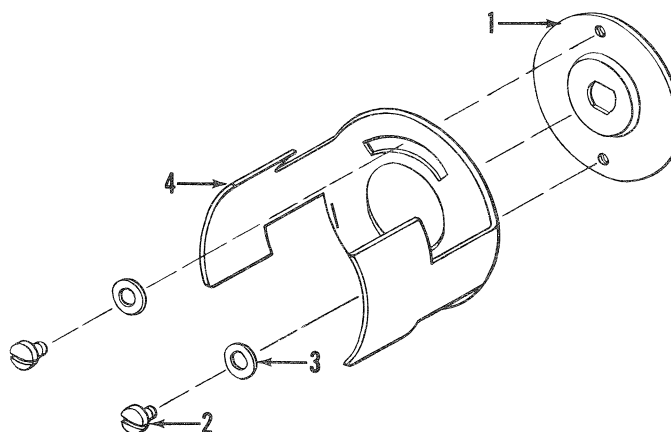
SHUTTER ASSEMBLY - INTERRUPTER
